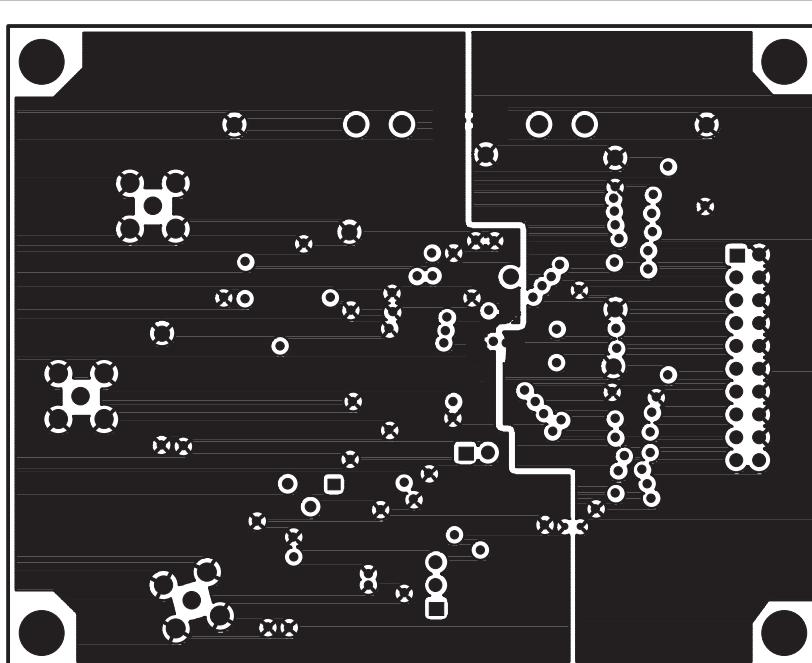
MAX1425 EV Kit PC Board Layout—Layer 2
